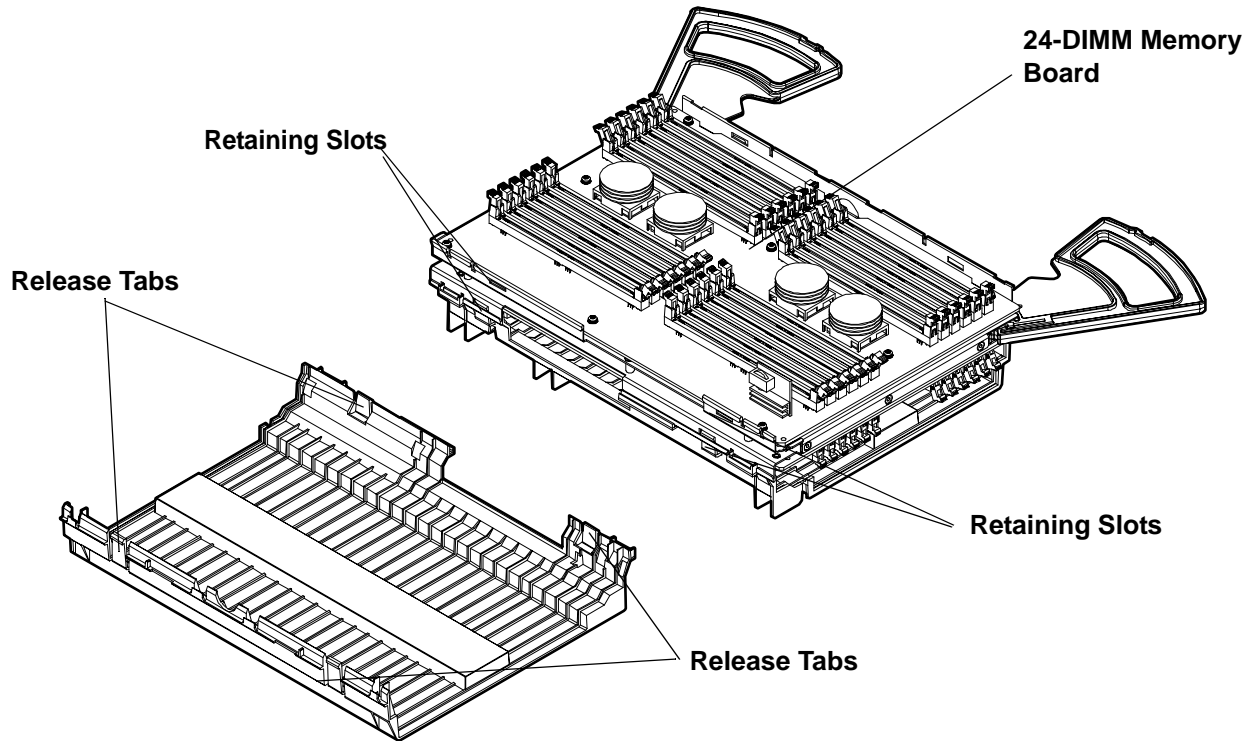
shows the memory carrier assembly removed from the chassis.
